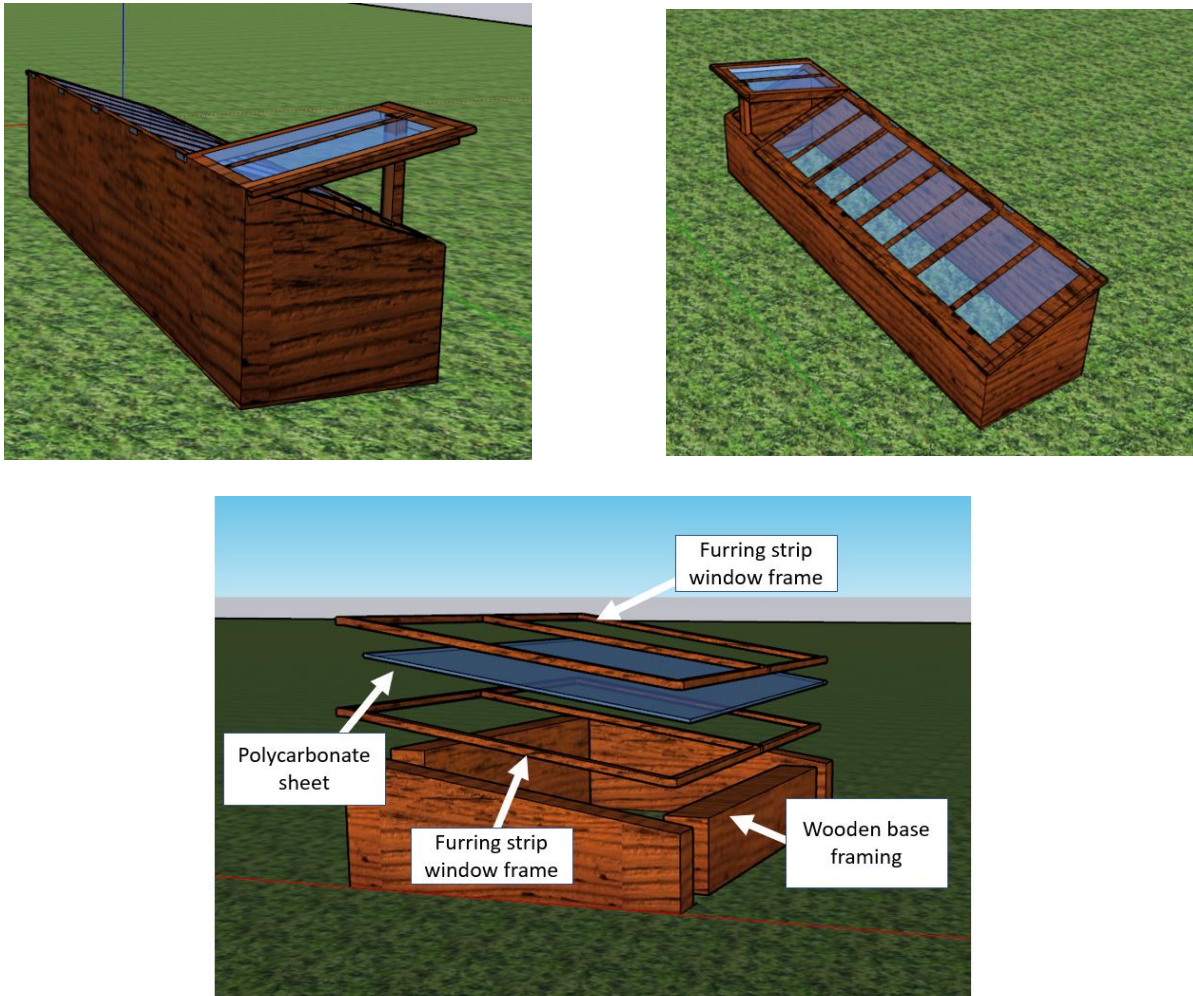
Isometric Views and Layering of Single-Winged Cold Frame
